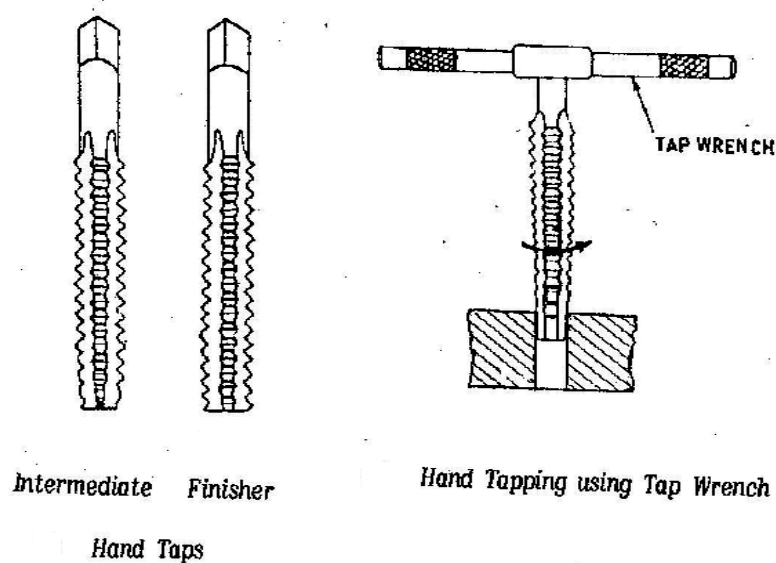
HAND TAPS AND TAPPING PROCESS USING TAP WRENCH
